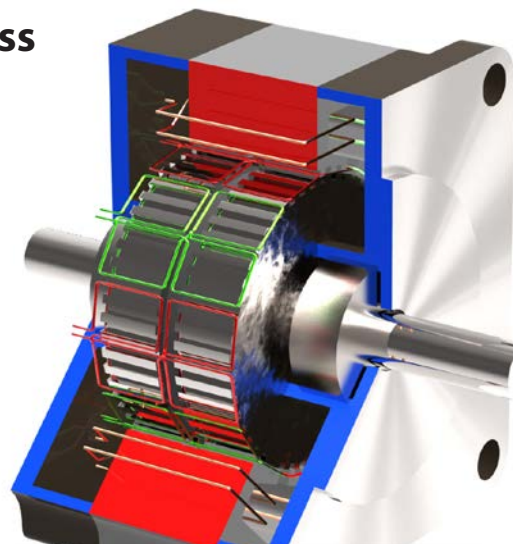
Cutaway view of the Mosolver showing the position sensor coils that have been added to a standard hybrid synchronous motor (All photos courtesy QuickSilver Controls).
